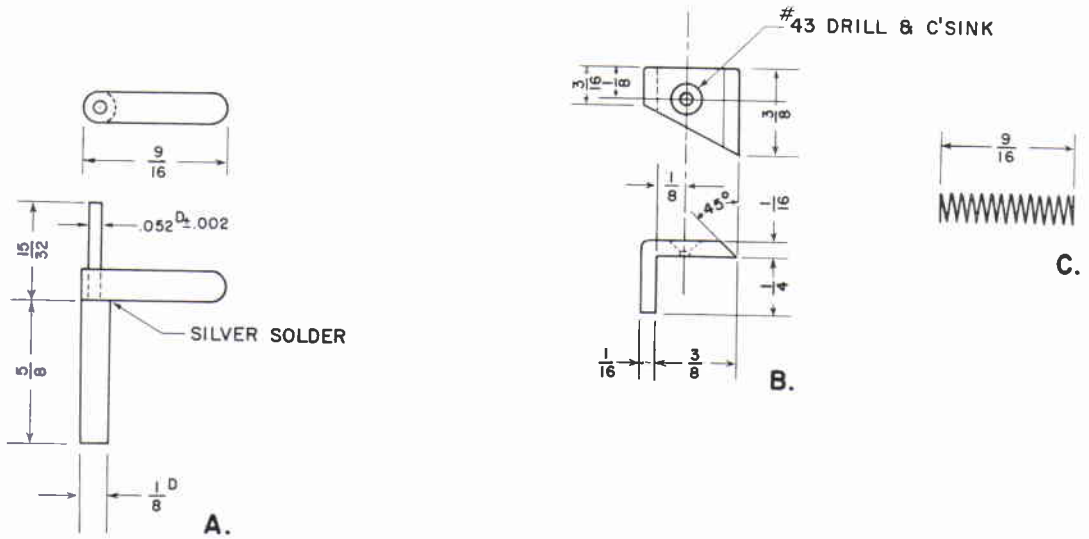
Drawings of lock components. A, Pin; B, cap; C, spring.
